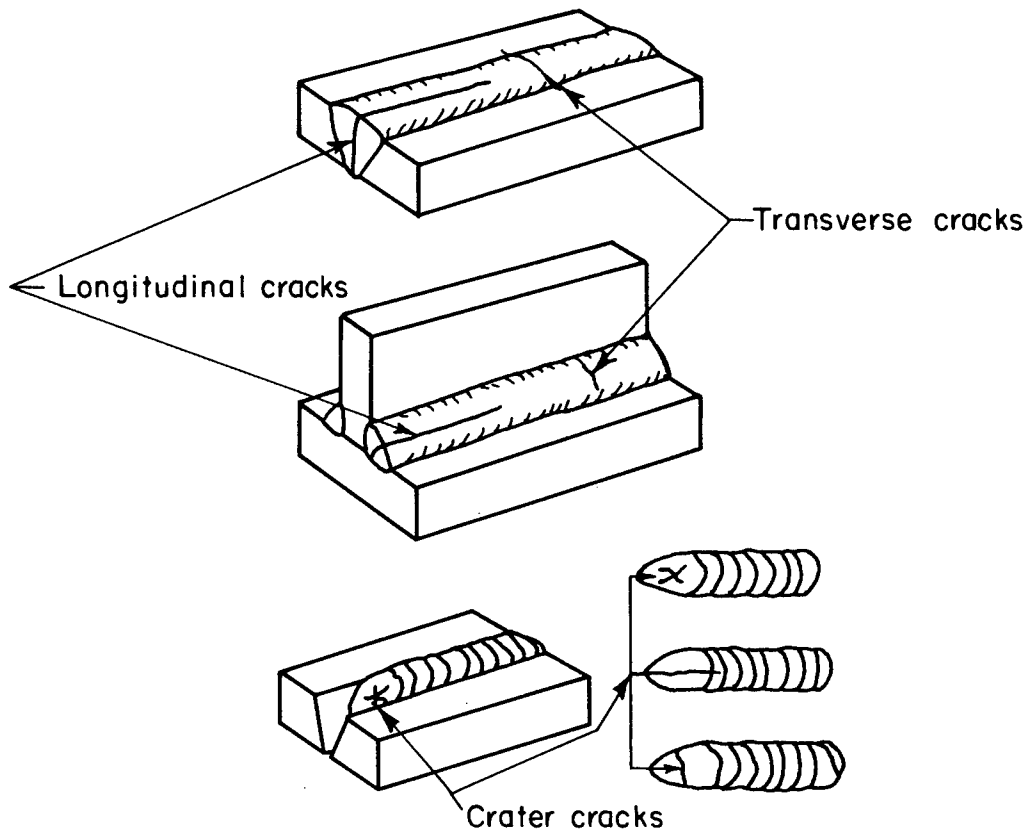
TYPES OF WELD-METAL CRACKS
